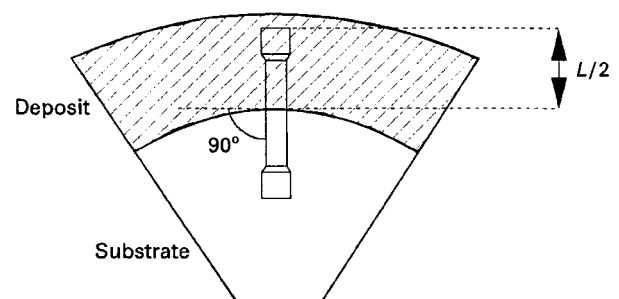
Diagram illustrating the location from which cross bond tensile test pieces were sectioned.
